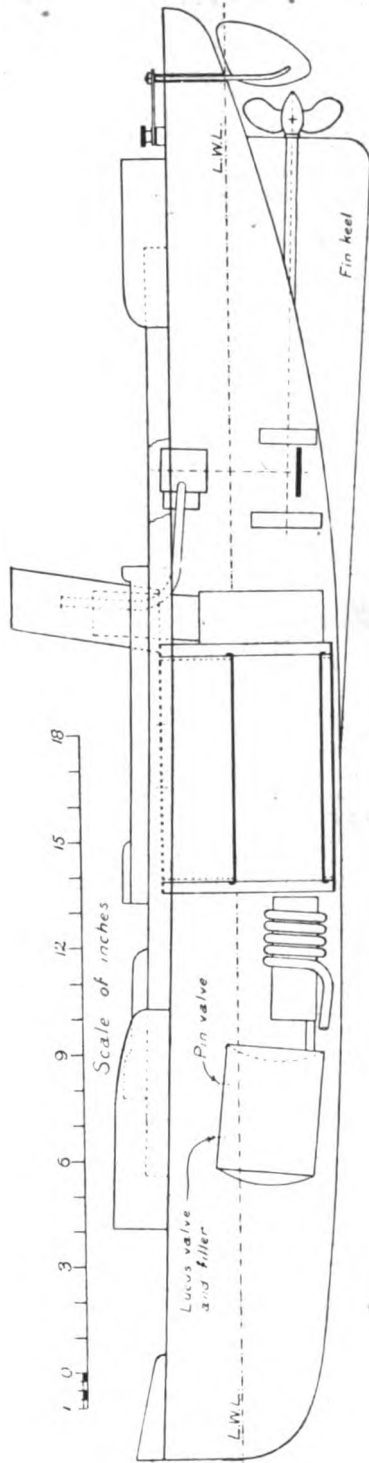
ELEVATION SHOWING ARRANGEMENT OF MACHINERY.
